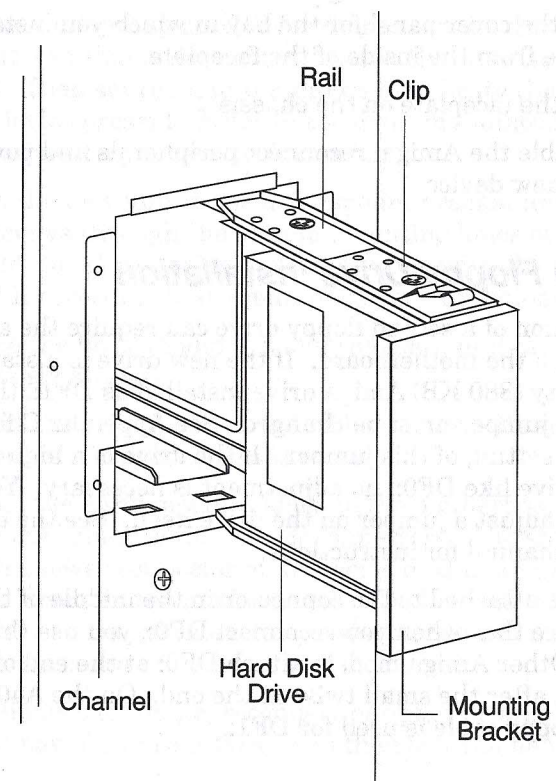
Drive with Adapter Bracket and Guide Rails
